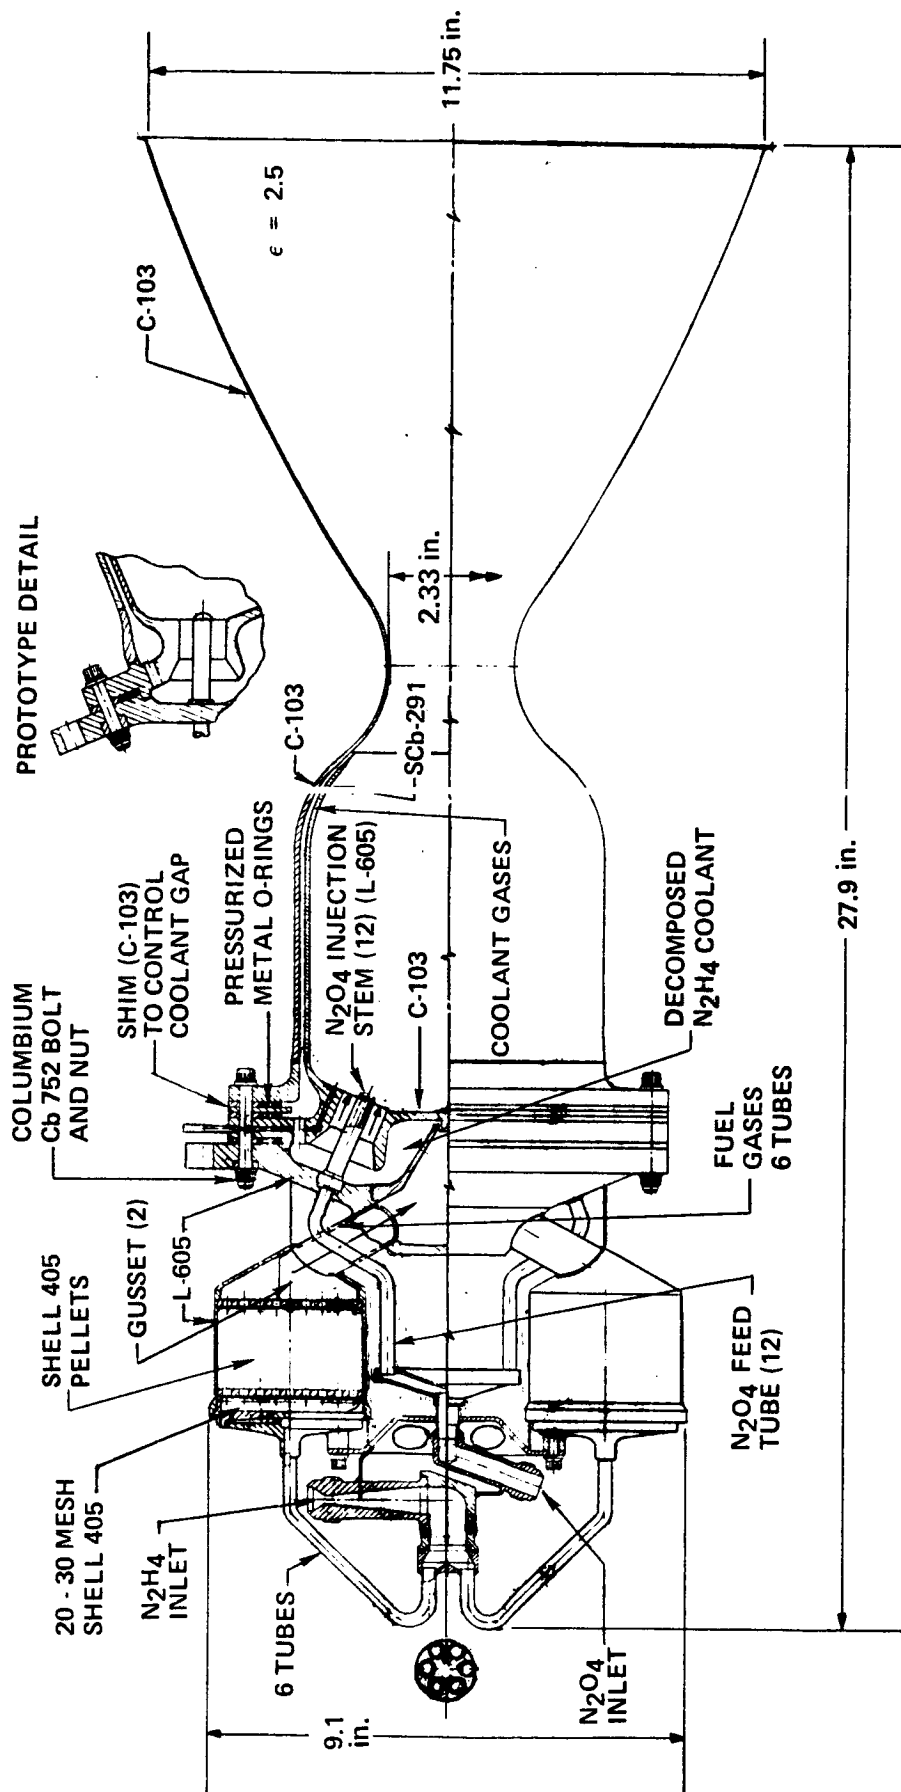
Sl. Preprototype Film Cooled Thrust Chamber with 100% Fuel Cooled Injector Face
